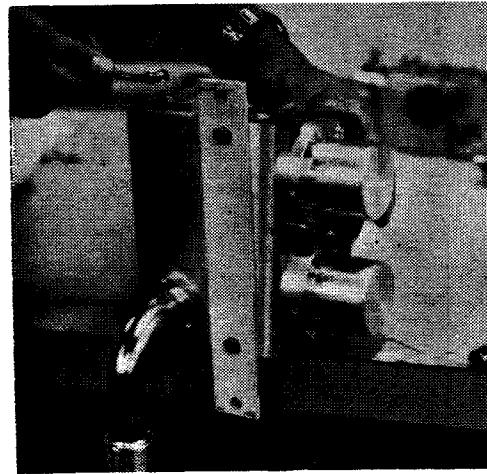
Removing Cover Plate from Inverted Valve Block
